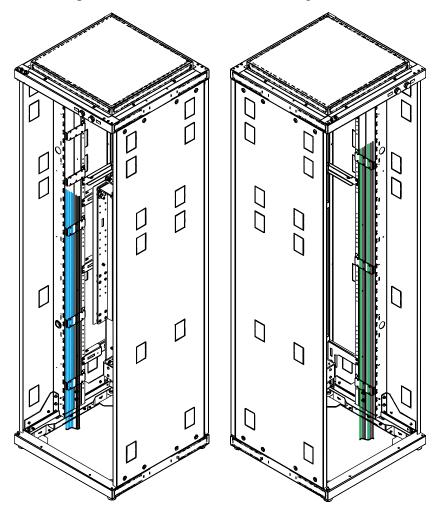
Cable Routing in Bottom Fed Cabinet
